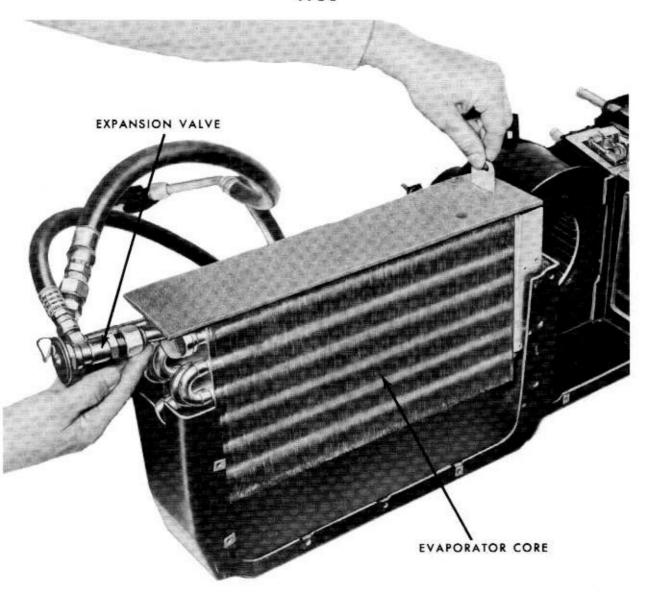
Evaporator Core Removal-1960-(60E-7812)
